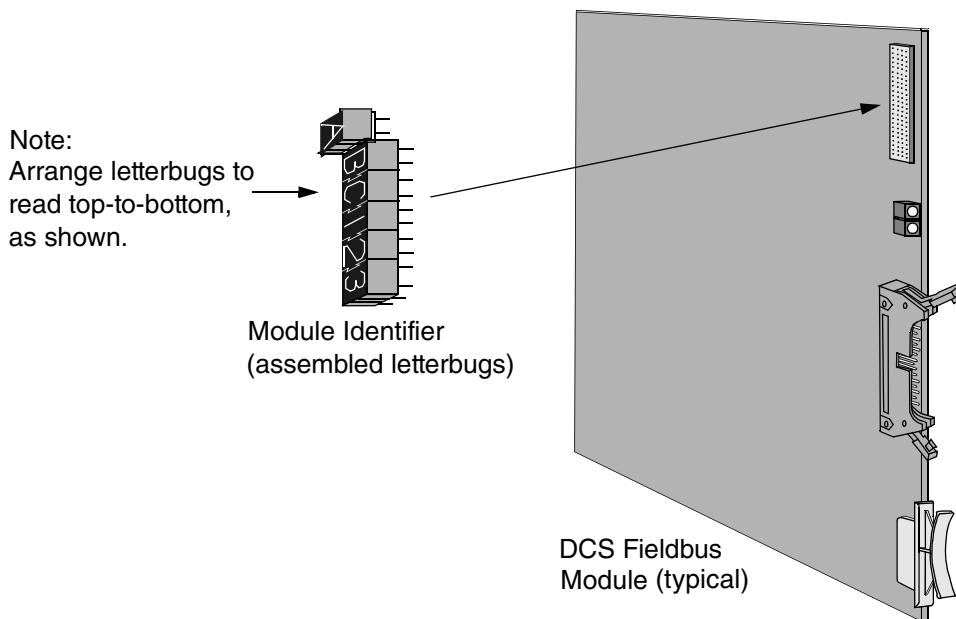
Module Identifier (Letterbug) Assembly and Insertion
